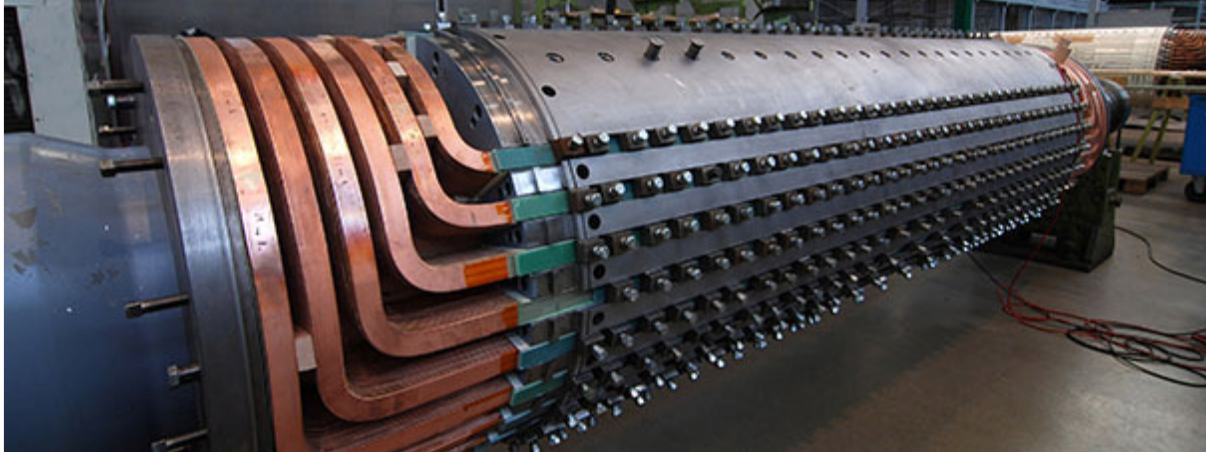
View of a 2-pole cylindrical generator rotor with both end-rings removed
